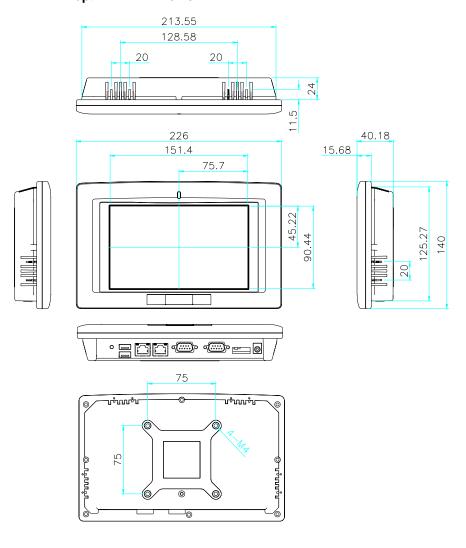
AFL-07A-N270 Dimensions (mm)
